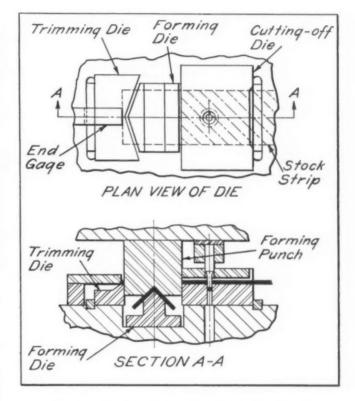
Shear Type Die with Trimming Die at Forming Station
